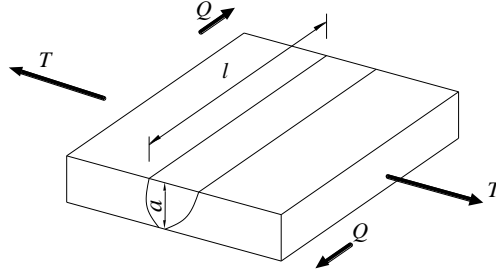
Forces Acting on Full Penetration Groove Welded Joint
